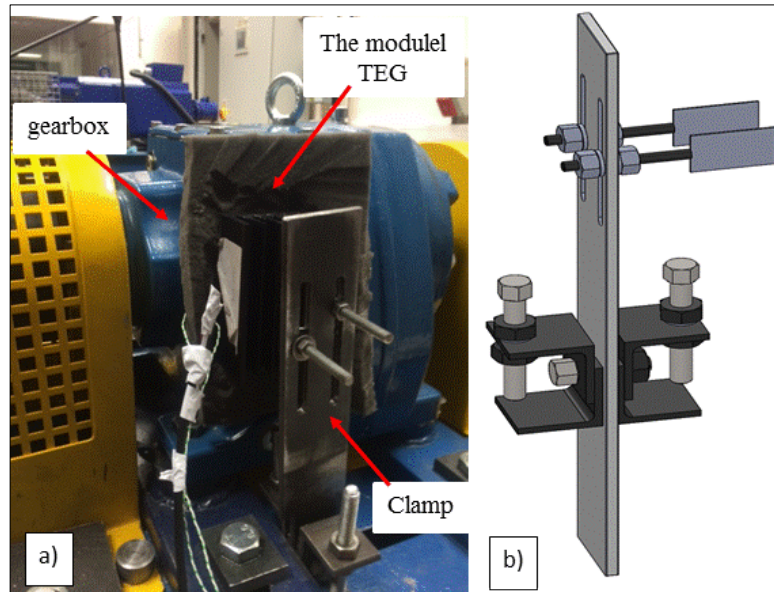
a) Module with developed clamp, b) illustrated of solid model of the developed clamp
